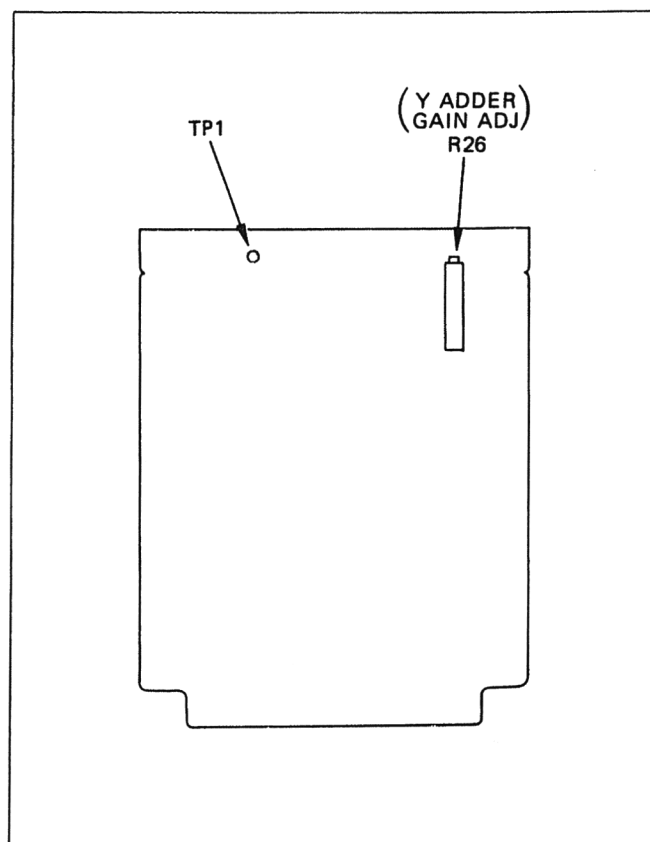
Trimmer Locations, Slideback Peak Circuit Assembly, A23
